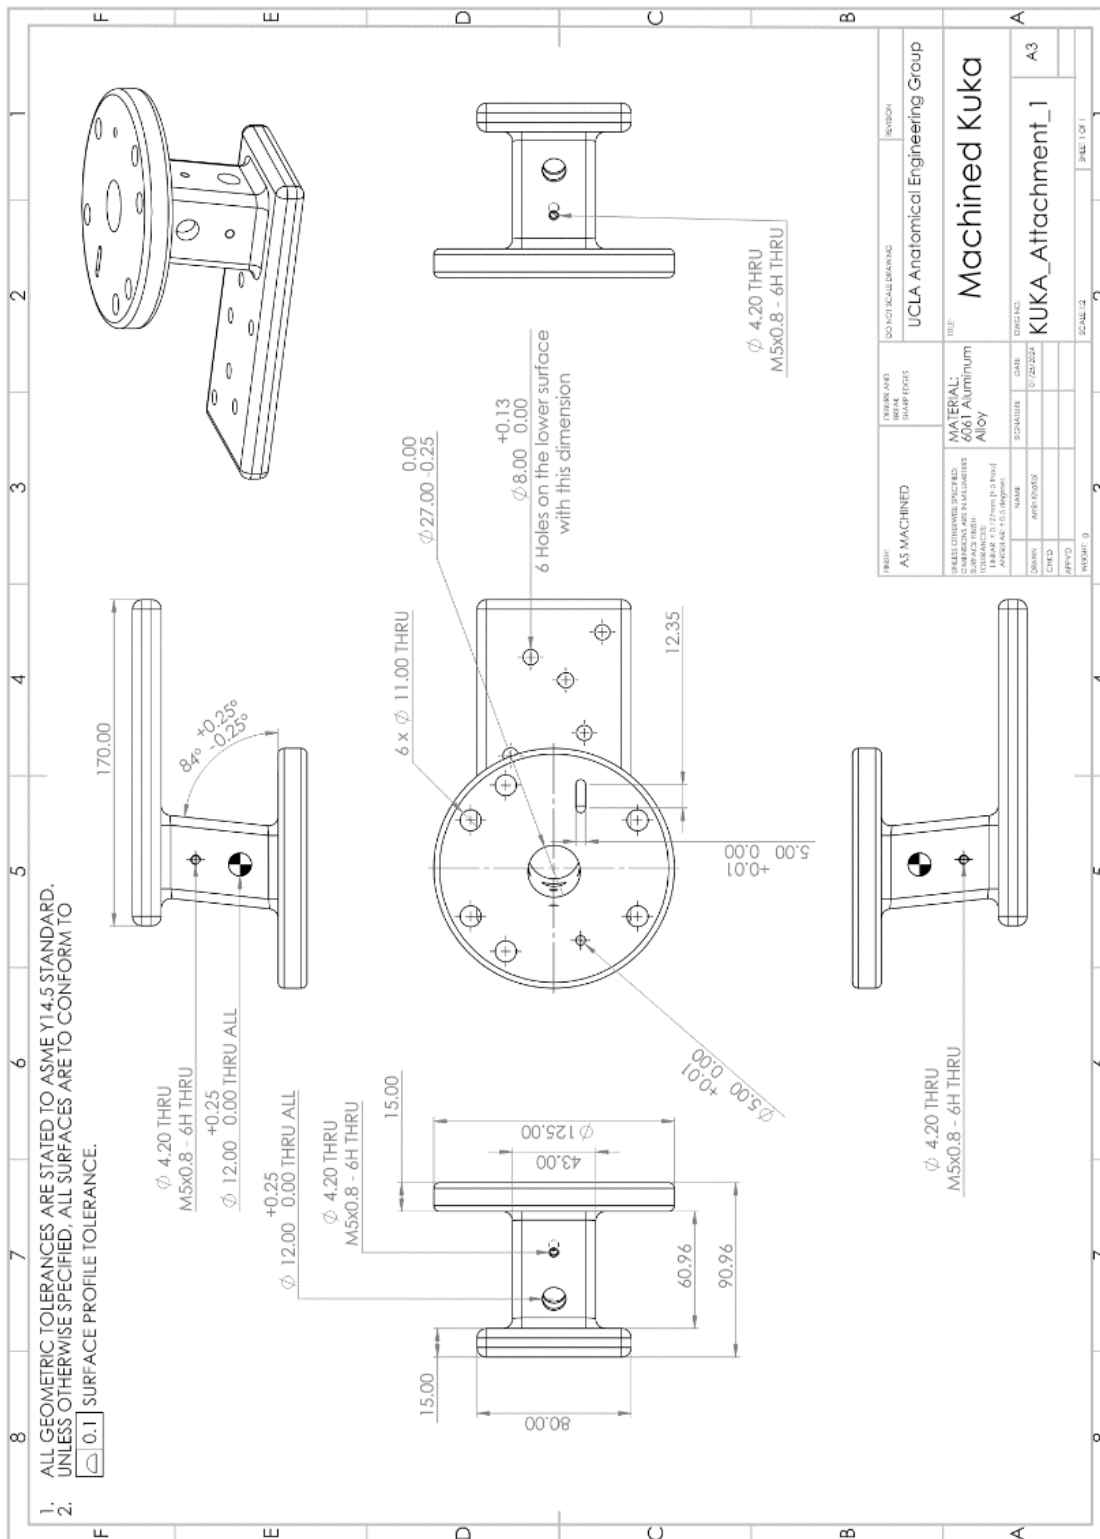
The KUKA Attachment device engineering drawing sent to SuNPc for machining.
